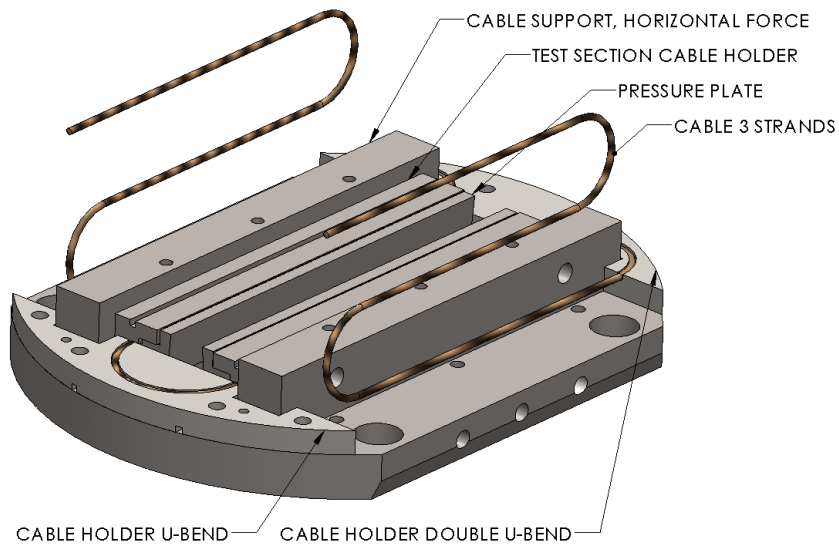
Routing the cable through the pressing mechanism as well as the supporting structure.
